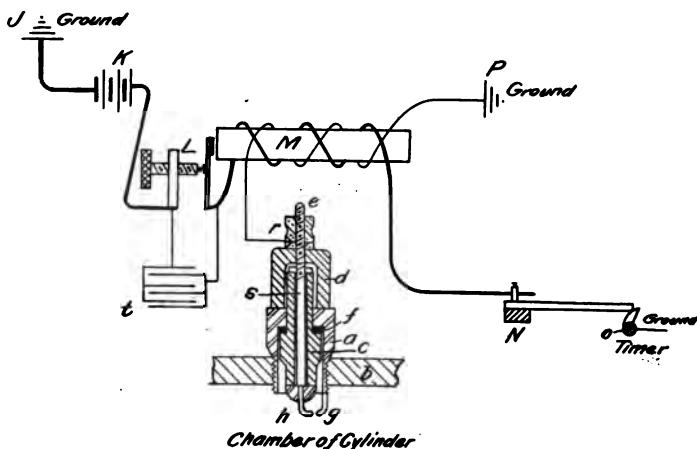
Single Cylinder Jump Spark Ignition, Showing Details of Spark Plug.
